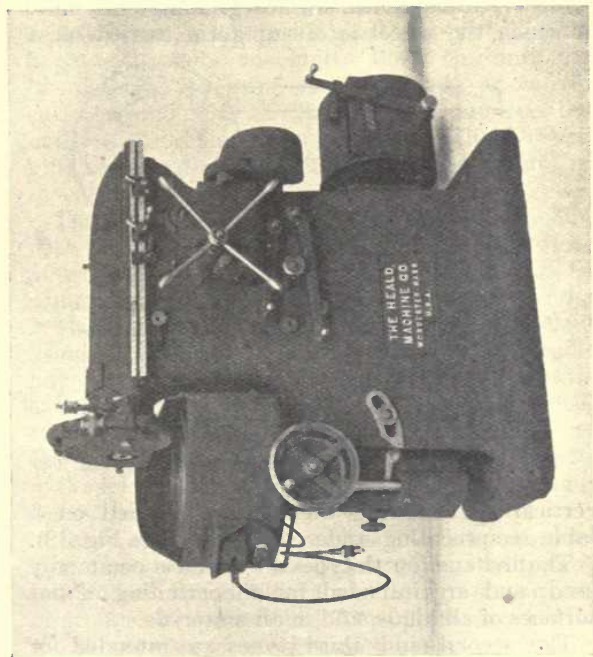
HEALD ROTARY SURFACE GRINDER
